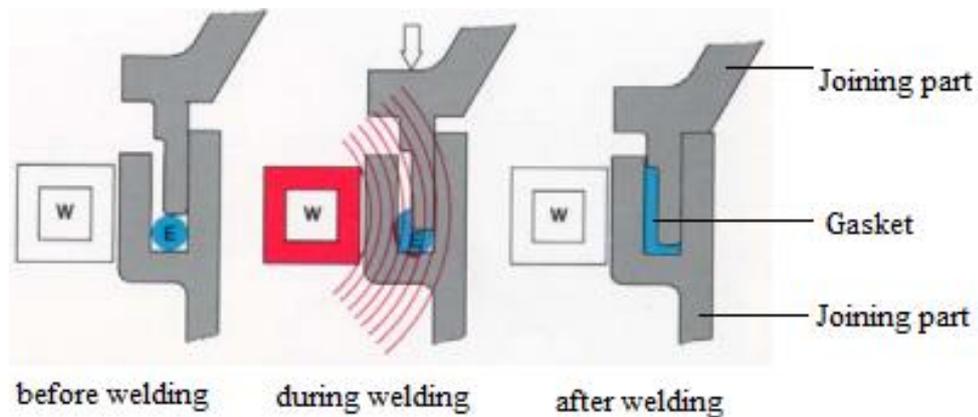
Working principle of extrusion welding (DEMS 2016).
